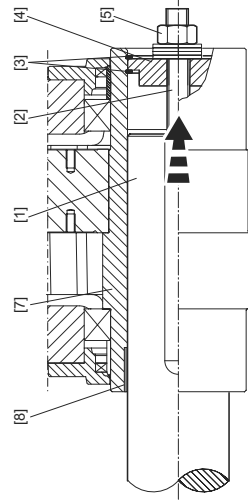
Mounting of hollow shaft gear unit with keyed connection
